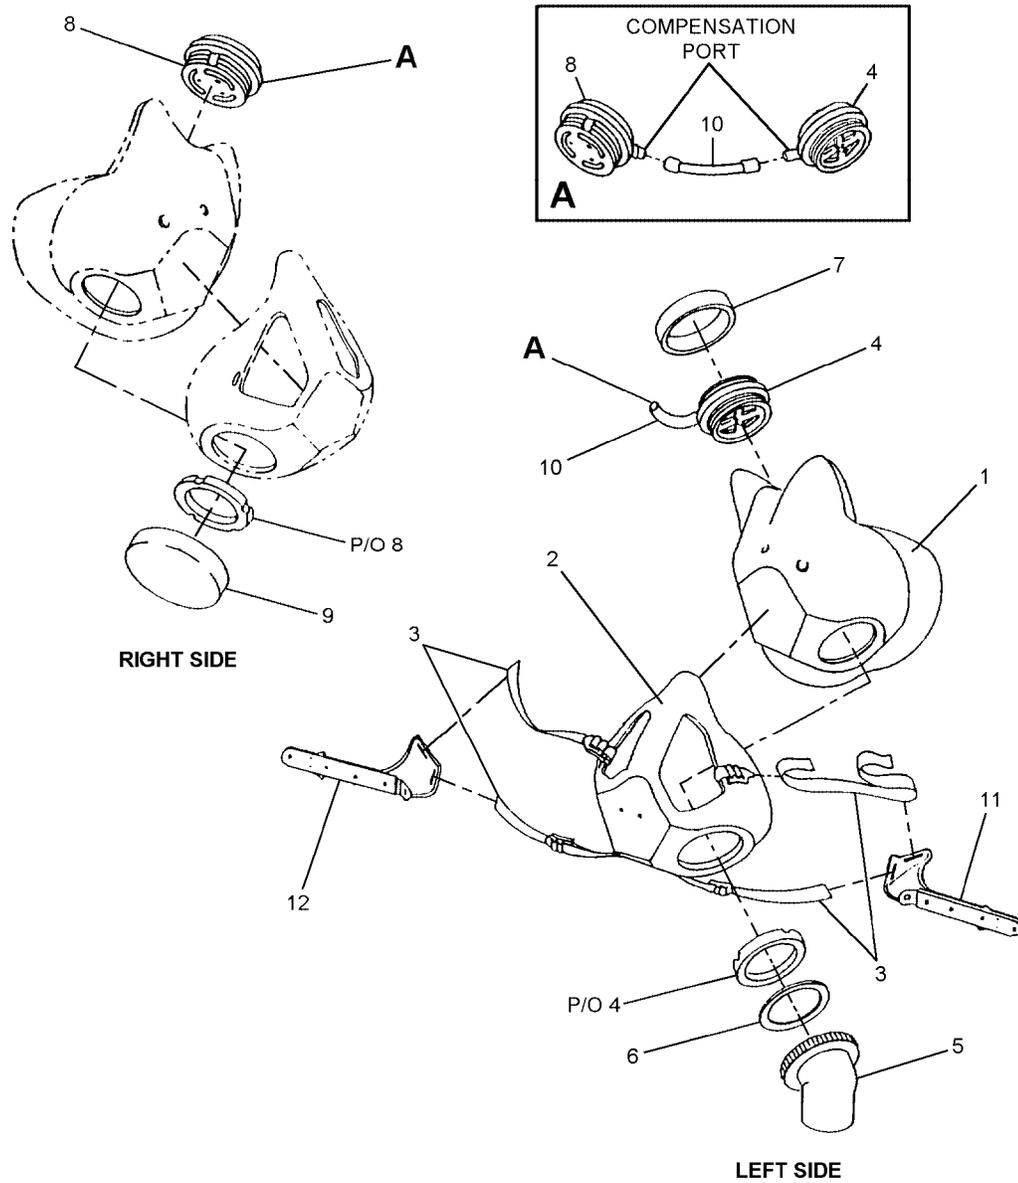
MBU-23(V)1/P Basic Oxygen Mask Assembly Components (Sheet 1 of 2)
